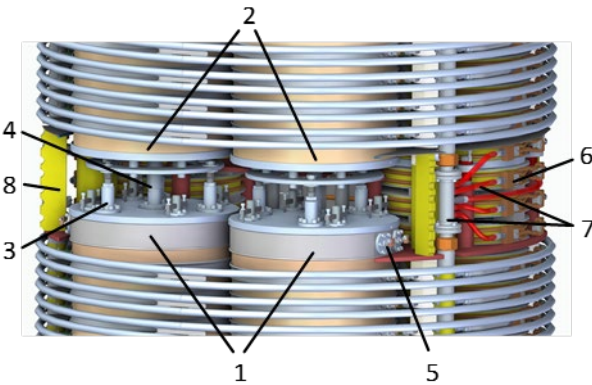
Connection of transformers in the middle section. 1 – bottom transformers, 2 – top transformers, 3 – supports for top transformers, 4 – oil connector, 5 – feed-through for final winding of transformer, 6 – magnetic coils, 7 – tubes for cooling, 8 – support for external rings.
